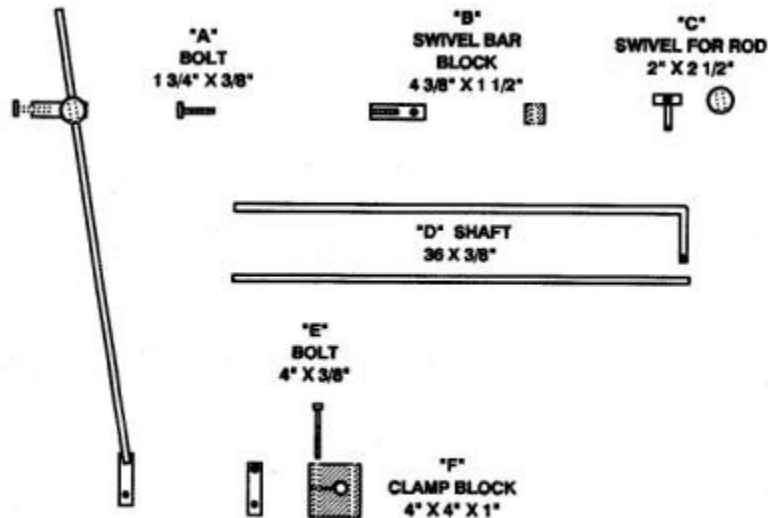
CLAMP BLOCK FOR SLIDE SHAFT
